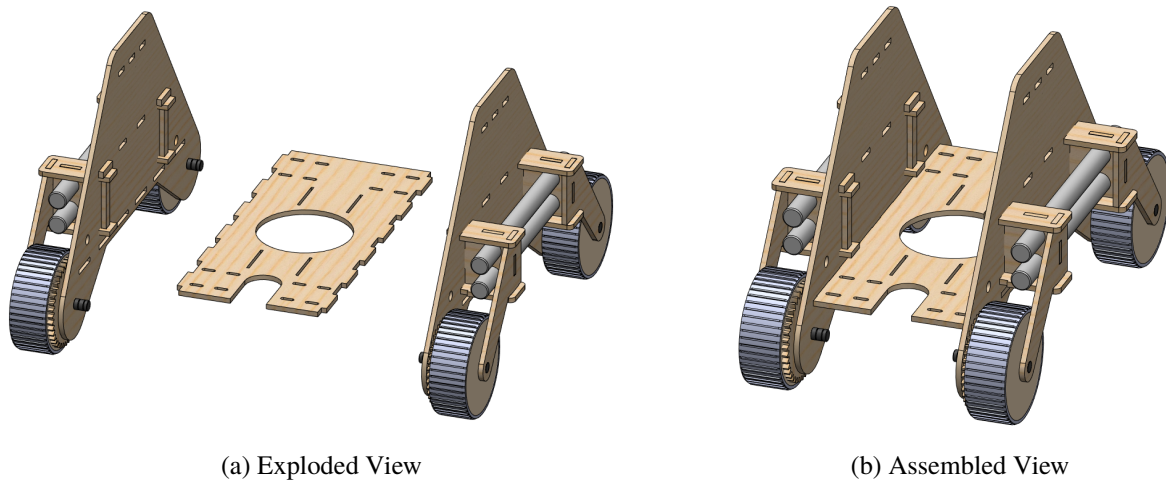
Exploded and assembled views of MARV-1N's chassis, including wheels and wheel supports
